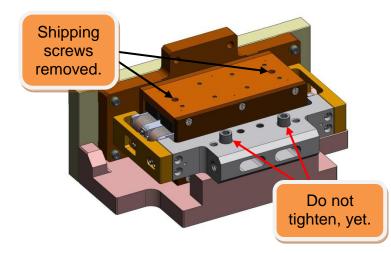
Upper (2) shipping screws are removed. Now, the Bobbin is loosely held to the Set-Up Fixture. You may want to insert a Teflon shim between the lower magnets and the Bobbin, to prevent hard contact.
